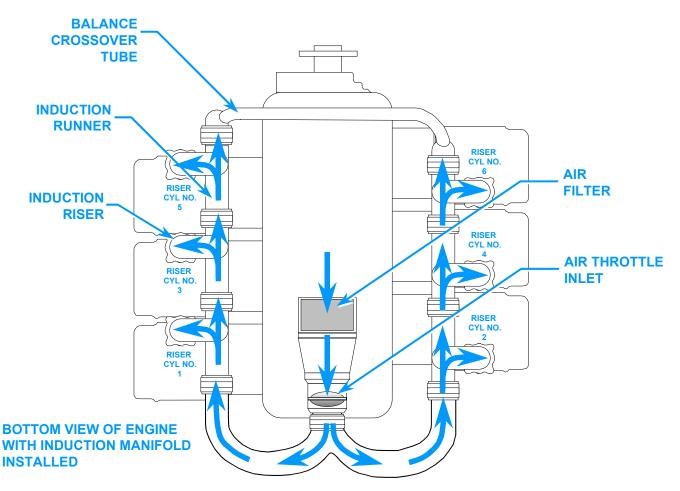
Bottom View of IO-550-B Updraft Runner Induction System.
